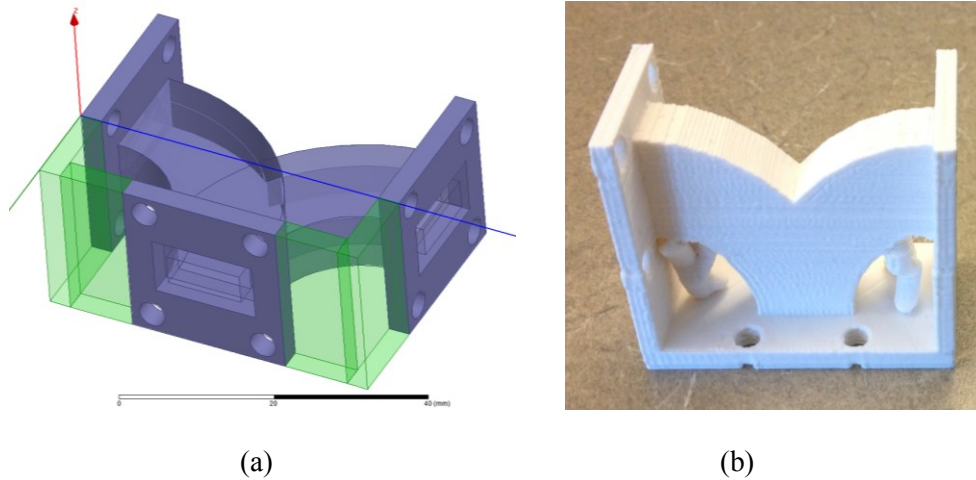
SPDT structure (a) Designed CAD model (b) Printed
